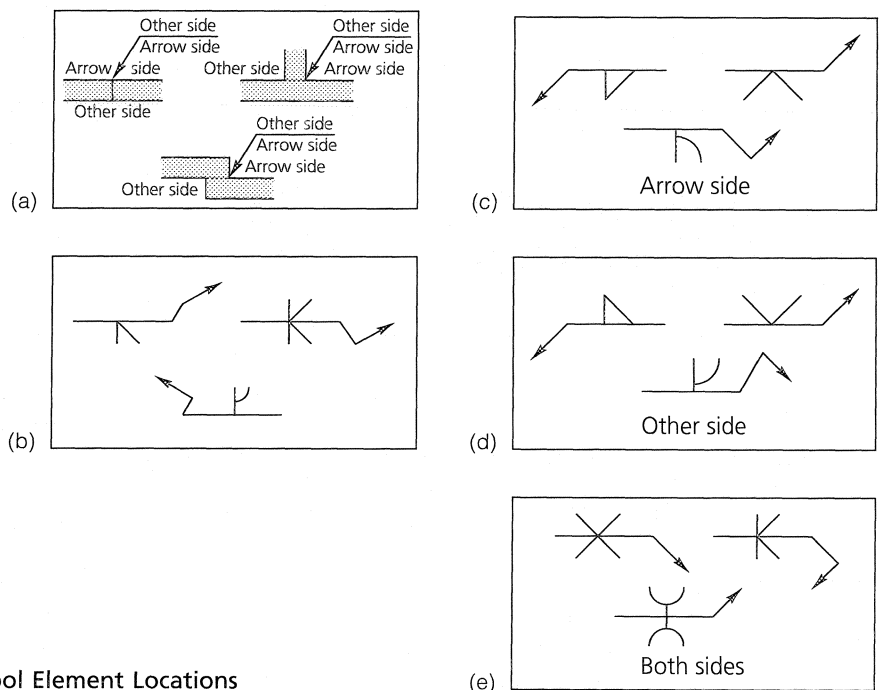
Examples of Welded Symbol Element Locations
